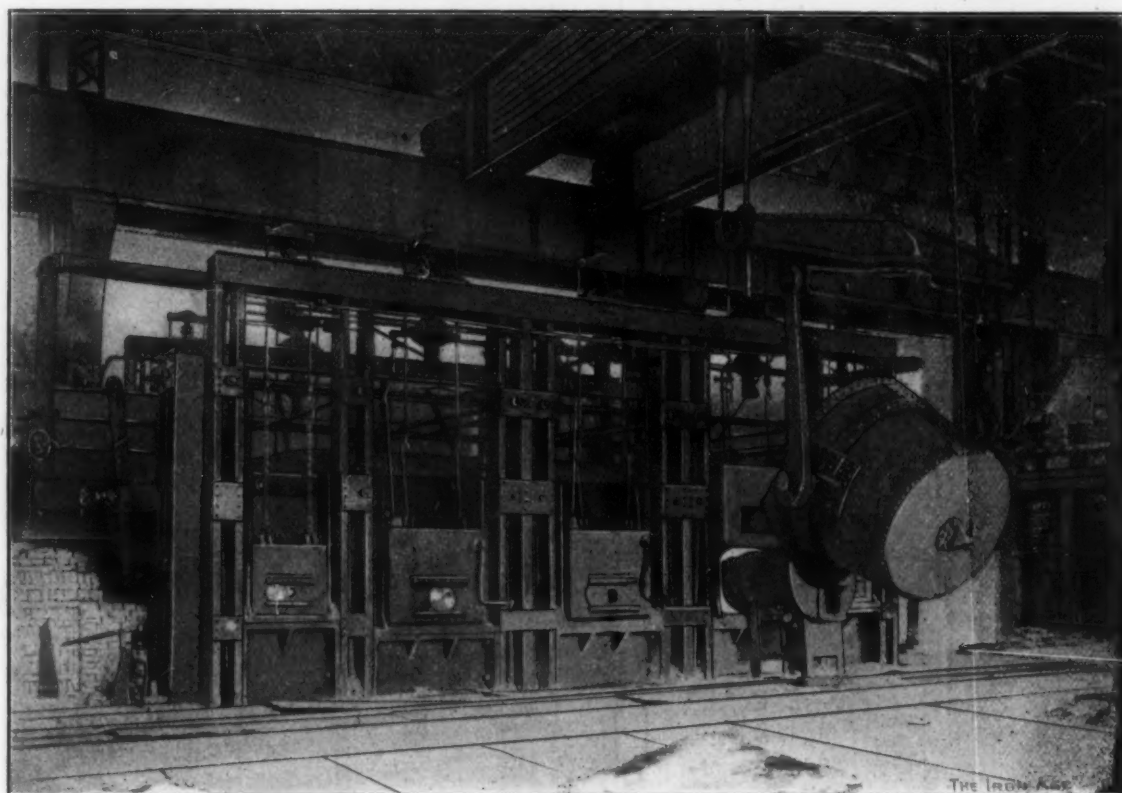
Front of Open Hearth Furnaces, Showing 40-Ton Crane Pouring Molten Metal Into Furnace.
